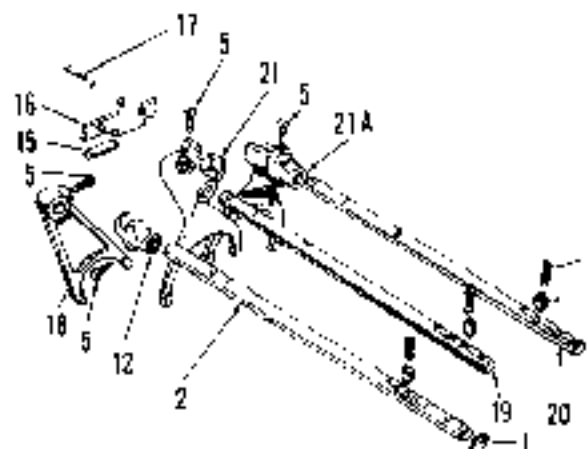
Exploded view of shifter rails and forks of the type used on six-speed models.
